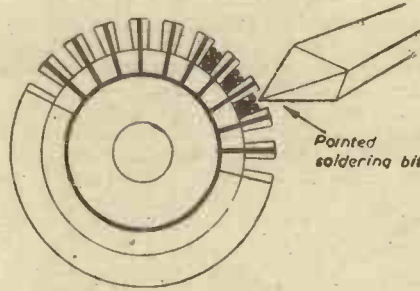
Method of soldering commutator by half-filling grooves with pieces of larger wire.
